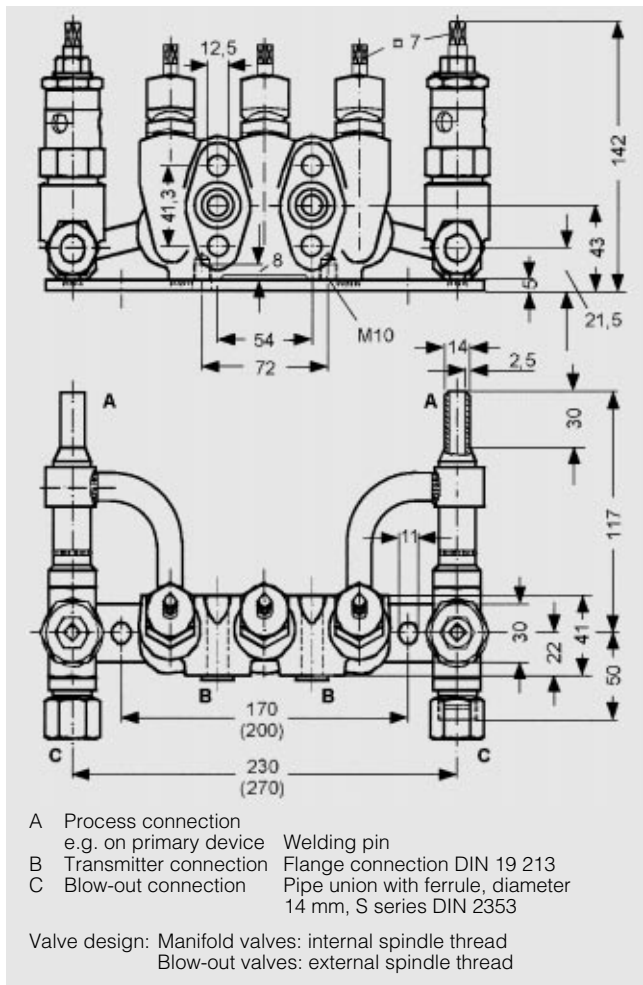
/74 Valve manifold combination DN 5/DN 8 (7MF9416-6C), dimensions (deviating dimensions for 7MF9416-6D shown in brackets)
